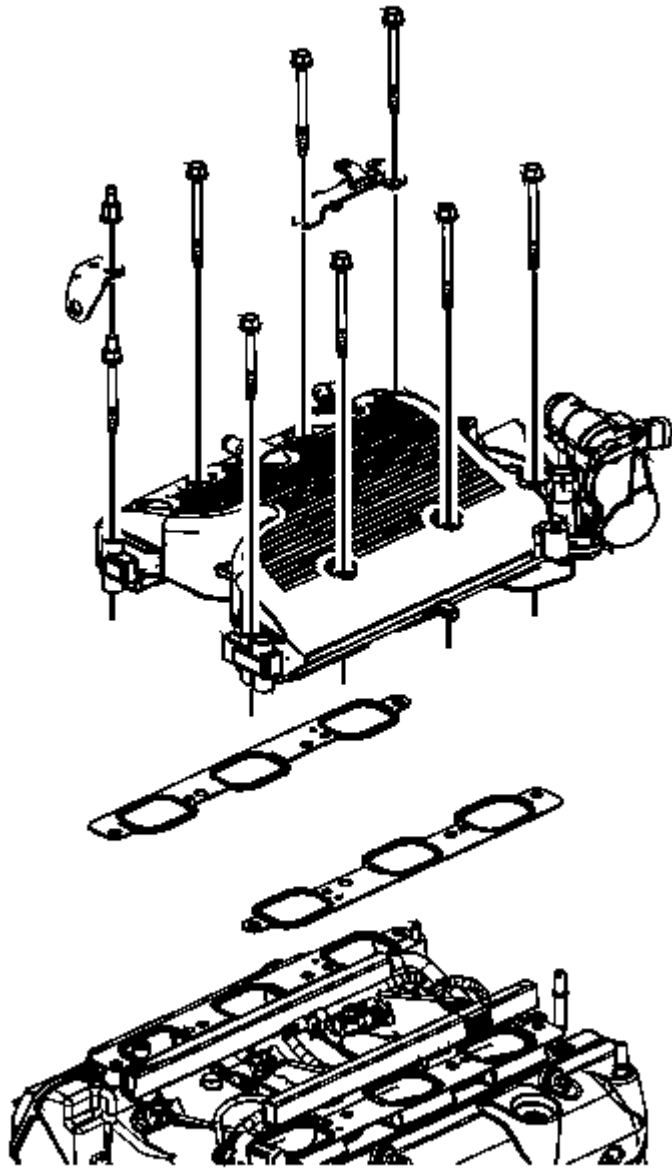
Upper Intake Manifold, Bolts & Gaskets
